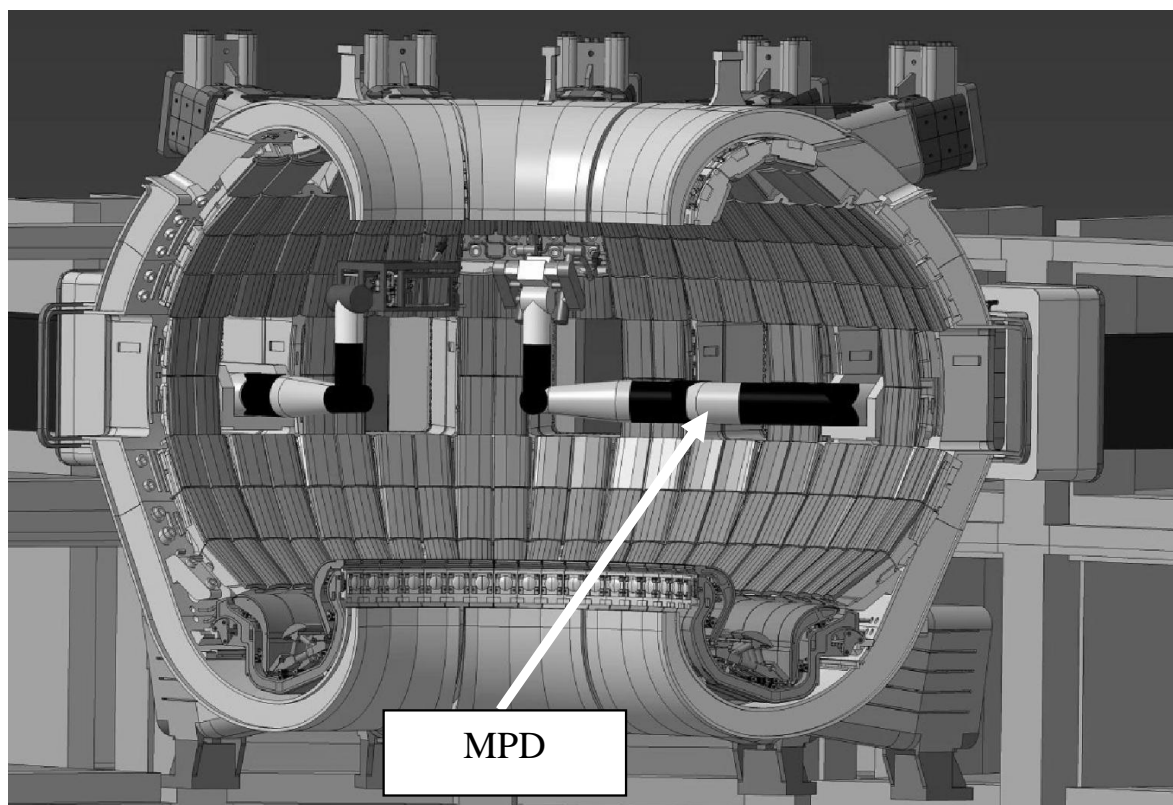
The ITER Multi Purpose Deployer operating inside the ITER torus
